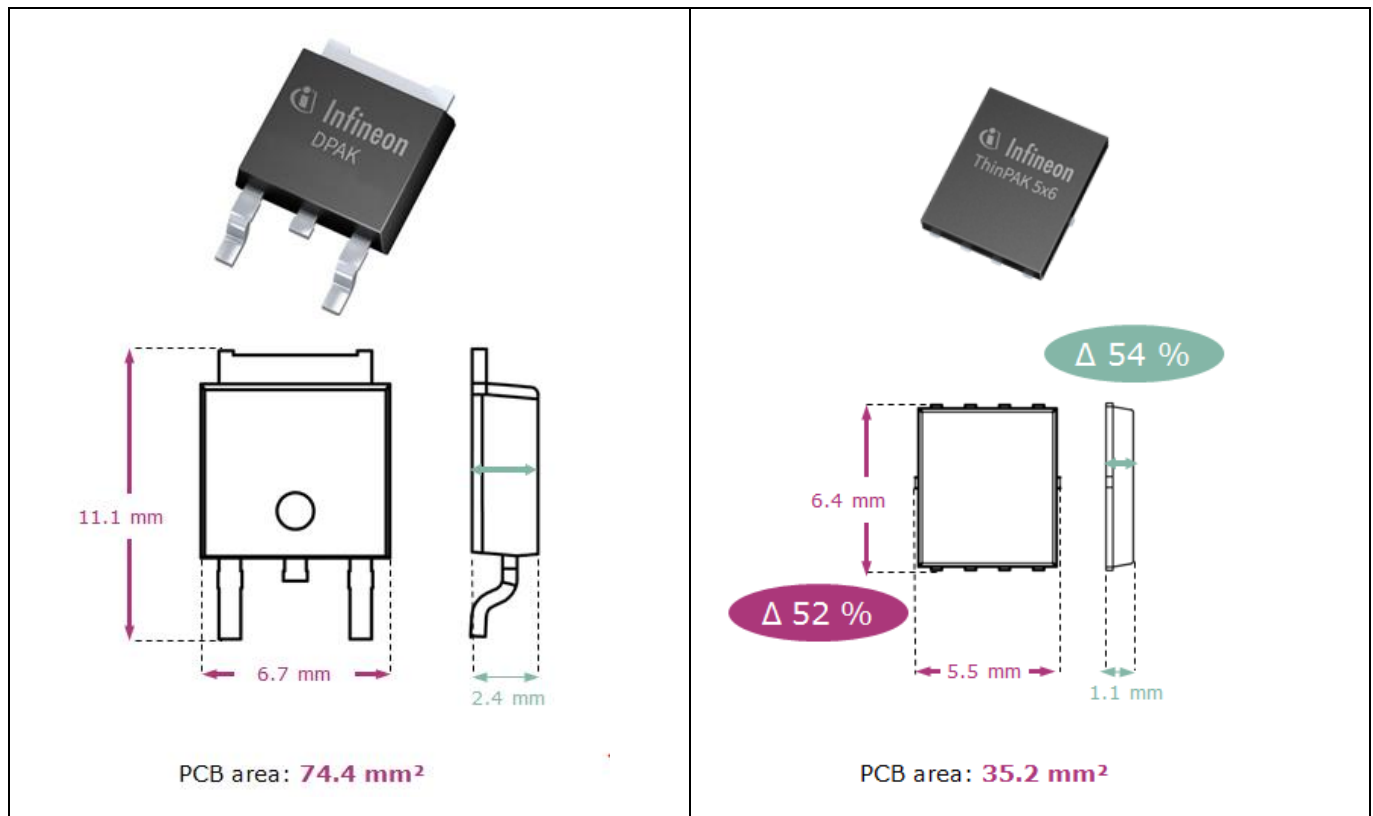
Package comparison of DPAK (74.4 mm² PCB area) and ThinPAK 5x6 (35.2 mm²)
